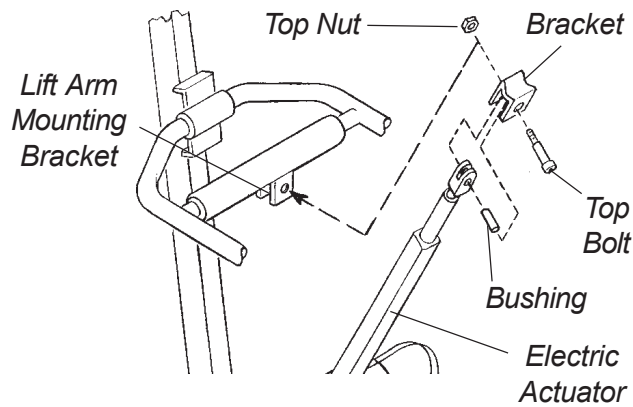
ATTACHING ELECTRIC ACTUATOR TO MAST
